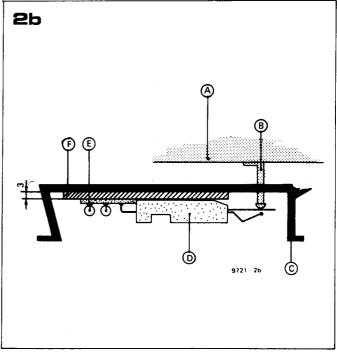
and 2b. Showing the mounting of the key contact blocks. (A) Key. (B) Actuator. (C) Chassis. (D) Contact block. (E) Divider board. (F) Spacer.
